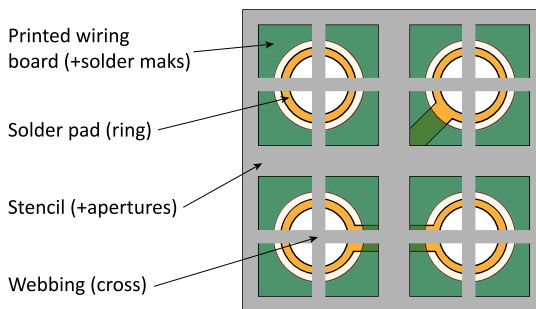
Stencil webbing (designing crosses into apertures) for reducing the hole-filling by solder paste in pin-in-paste technology.
